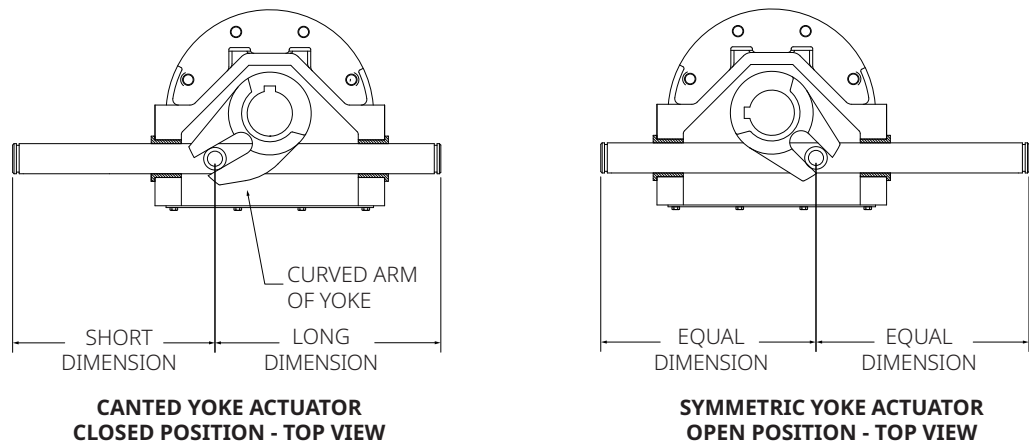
HP65/HP80 Piston Rod and Yoke Orientation for Canted Assembly
